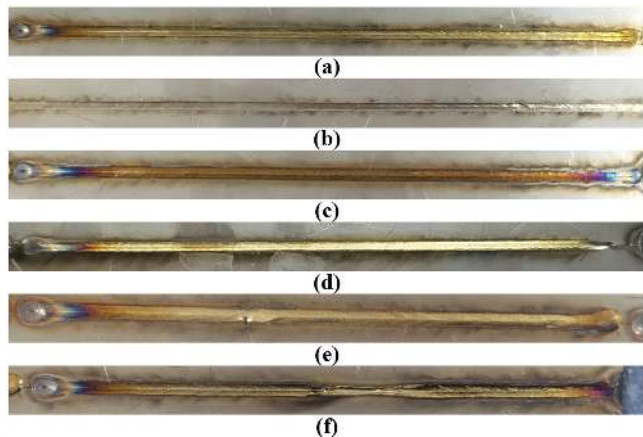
(a)Sound well weld; (b)Lack of fusion; (c)Burn through; (d)Dislocation; (e)Inclusion; (f)Large gap.
